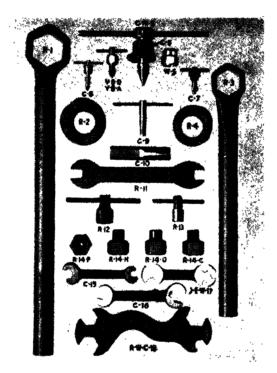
Special tools for repairing gas welding equipment (Courtery of: Victor Equipment Company)
